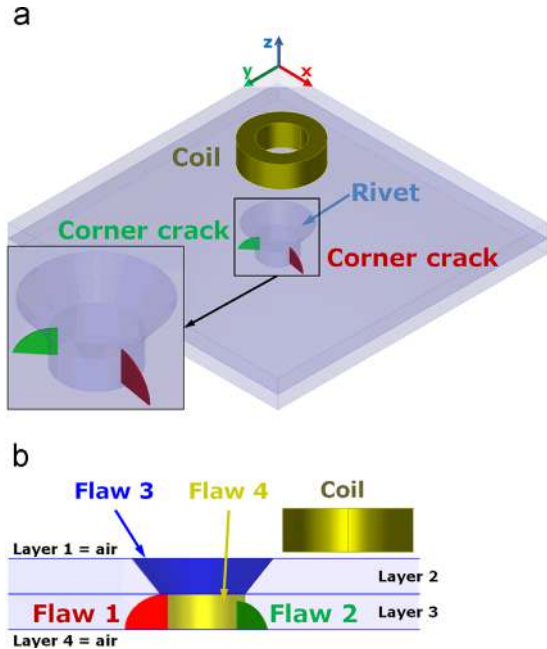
Inspection of a fastener site inspection with an absolute pancake coil. (a) Two skewed corner cracks depart radially from the rivet and (b) detail of problem as it is considered from the electromagnetic modeling point of view.
